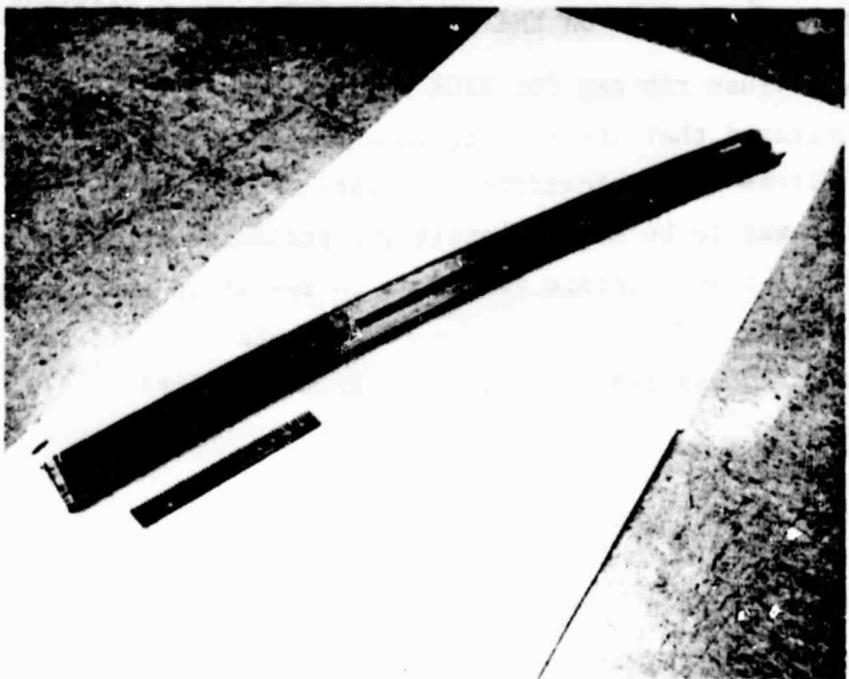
Truss Rib Cap, P/N 1608280-118 for H20A Specimen
